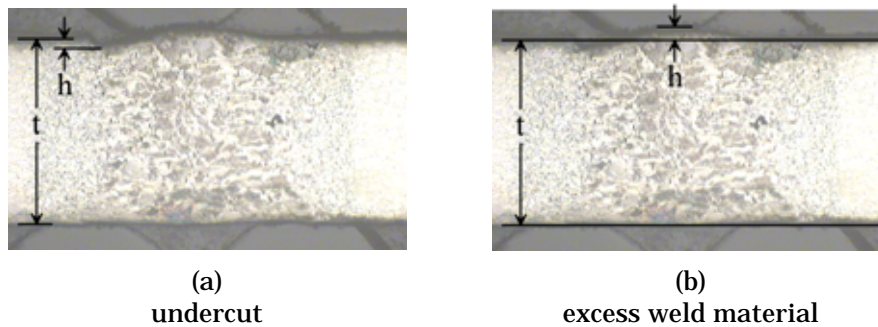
Imperfections of welds of the applied tailor welded blanks.
